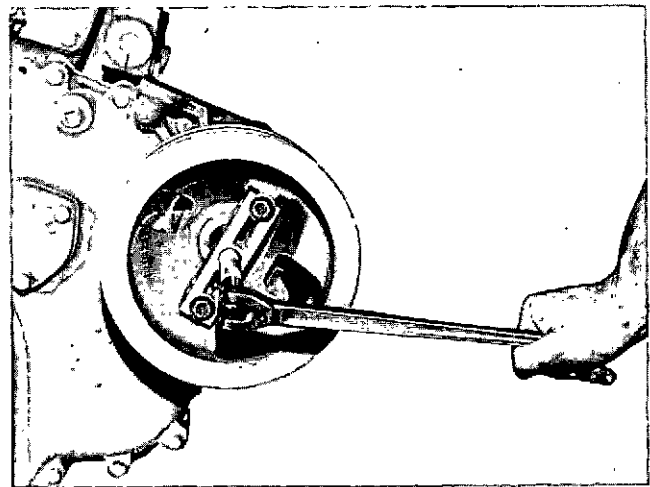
, V40056. Removing water pump drive pulley with ST-647
